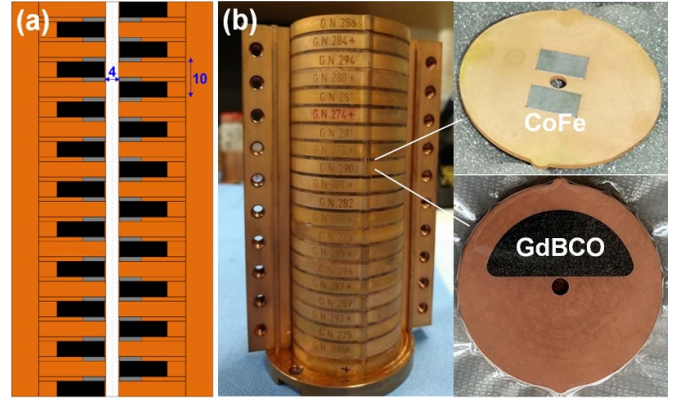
(a) Midsection view of the 10-period staggered-array bulk HTS undulator; (b) cutaway view of the undulator, with 20 GdBCO-Cu pieces, 19 CoFe-Cu pieces and a half copper shell shown in the figure. Each 4 mm-thick, half-moon shaped GdBCO disk is shrink-fitted into a slotted copper disk; two rectangular 1 mm-thick CoFe poles are shrink-fitted into a slotted copper disk; all GdBCO-Cu and CoFe-Cu pieces are clamped by a long copper shell. The undulator has a period length of 10 mm and magnetic gap of 4 mm.
